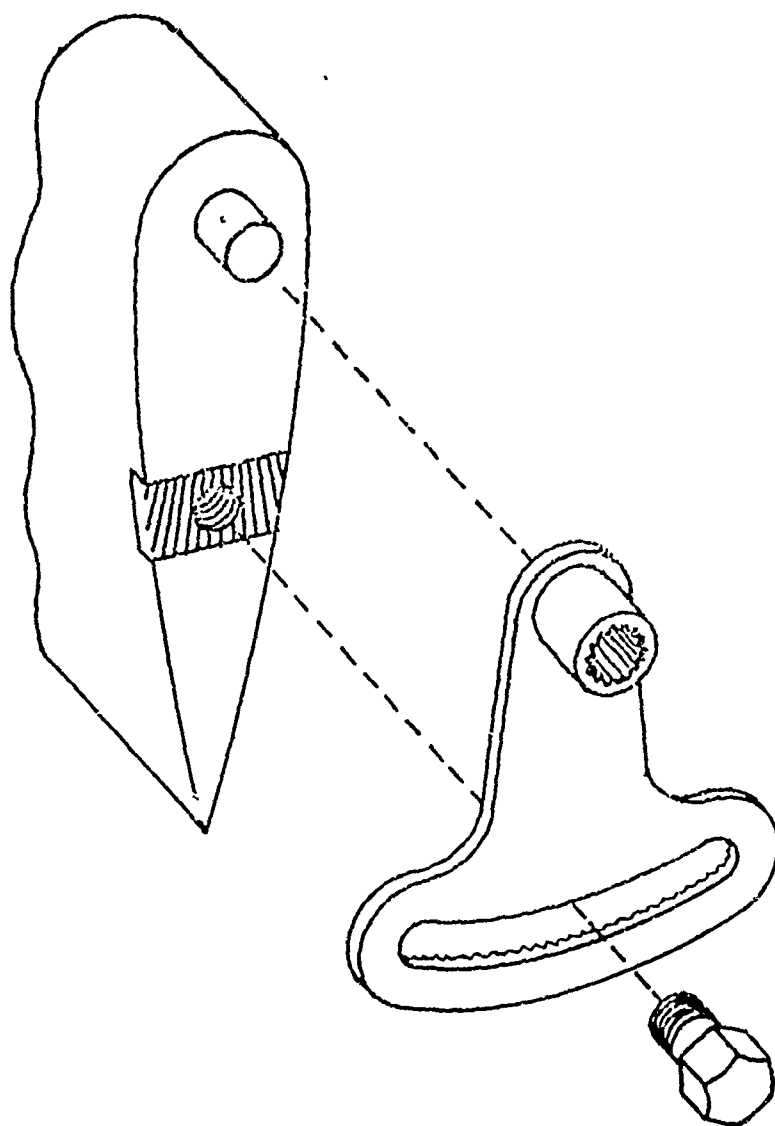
ASSEMBLY OF ADJUSTMENT LEVER TO LOUVER END
